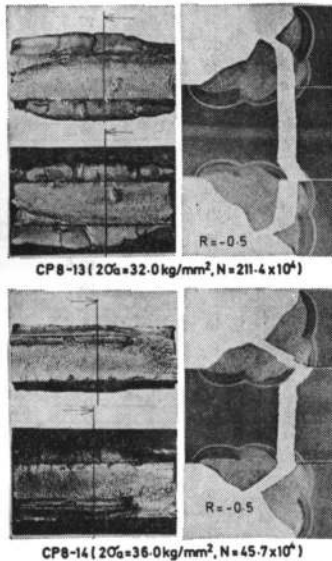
Fracture surface and macrosection showing fatigue crack initiation at the root of cruciform fillet welded joints (toe peened)
